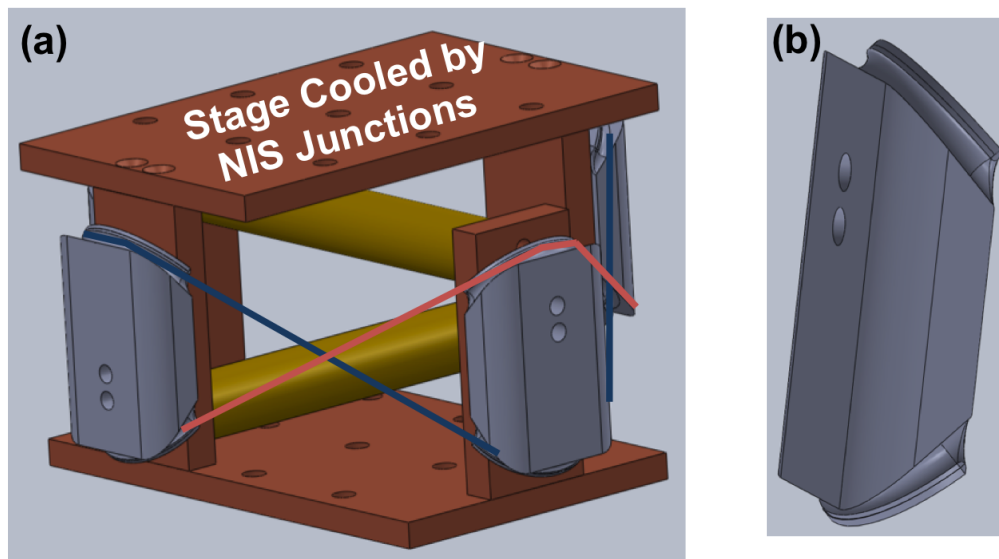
CAD rendering of the cooling platform assembly. The full assembly is shown in (a); the Kevlar is drawn in two colors to show the winding of each cord. A single Aluminum endcap is shown in (b). The slots for the Kevlar are cut at a 45° angle and the edges have been rounded.
